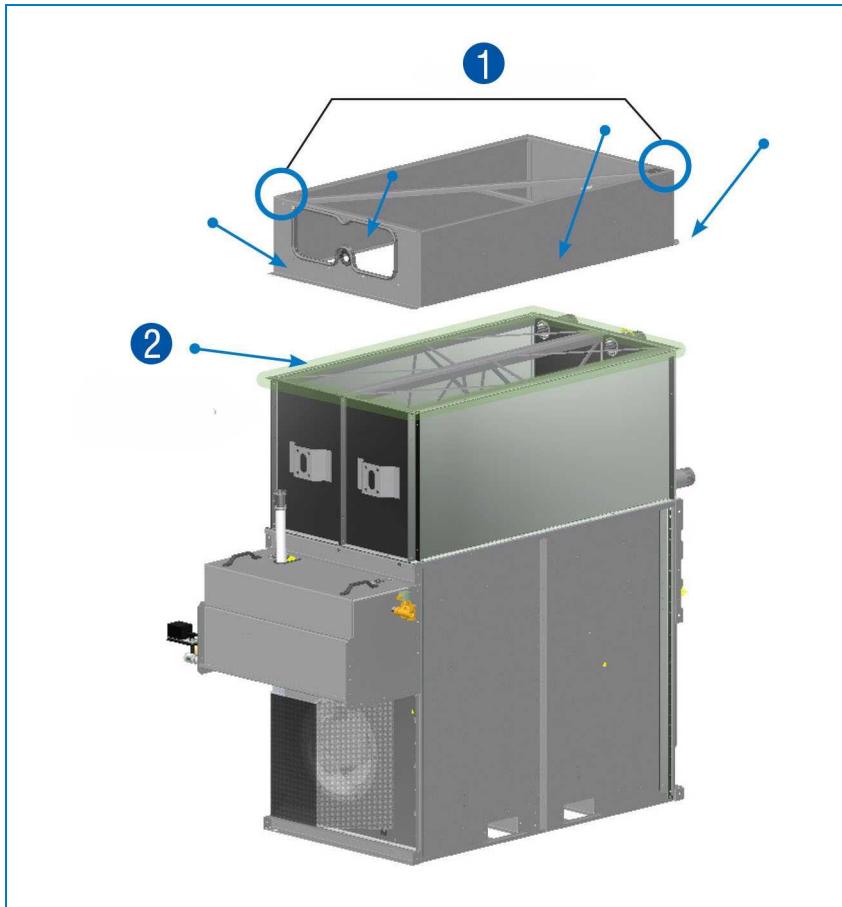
Attaching the spray section to the module - 1. Lifting points, 2. Sealer tape applied around perimeter.
